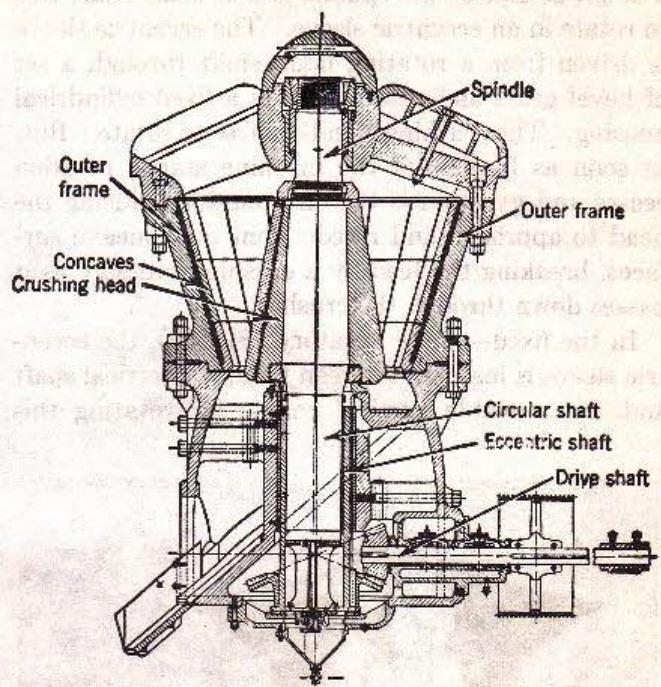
Sectional drawing of gyratory crusher of suspended-spindle type. (*Allis-Chalmers Mfg. Co.*)
